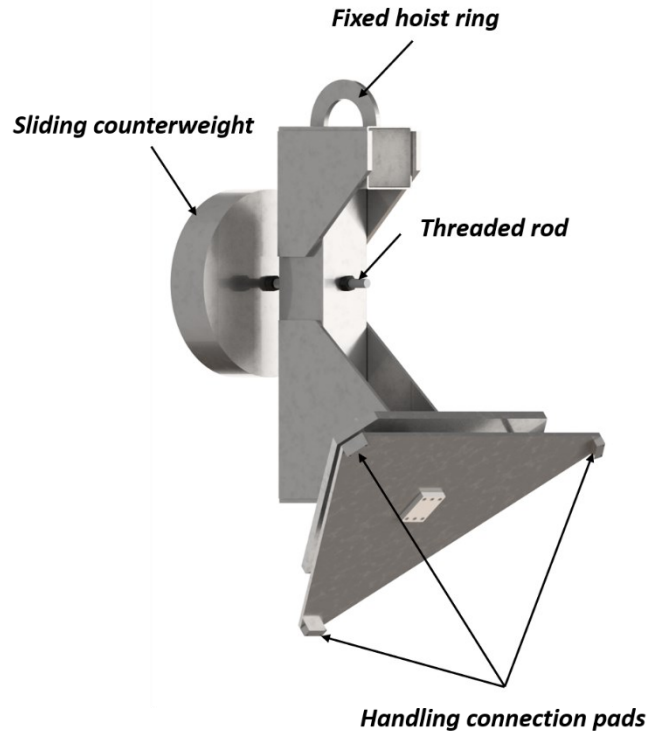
C-shaped handling for M7 installation. The interface between M7 and the handling is between the 3 branches embracing M7 and the 3 connection pads of the handling. The handling is equipped with a fixed hoist ring and movable counterweight to tune the position of the barycentre.
